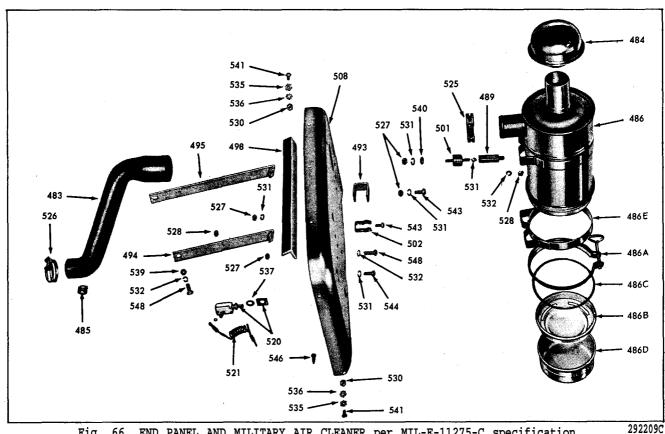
, END PANEL AND MILITARY AIR CLEANER per MIL-E-11275-C specification
